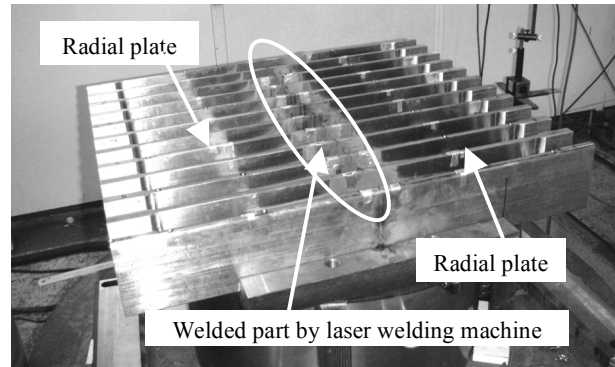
Overview of welded radial plate (test piece) with 4 kW YAG laser welding machine.
